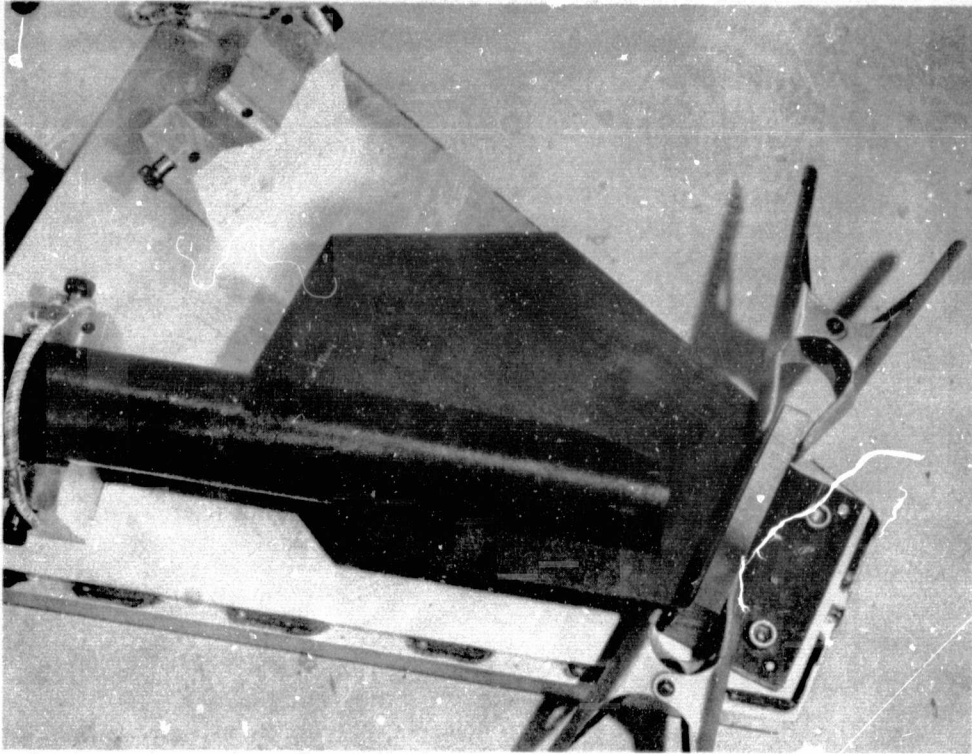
Strut Assembly - Slotted Tube Installed on Gusset
